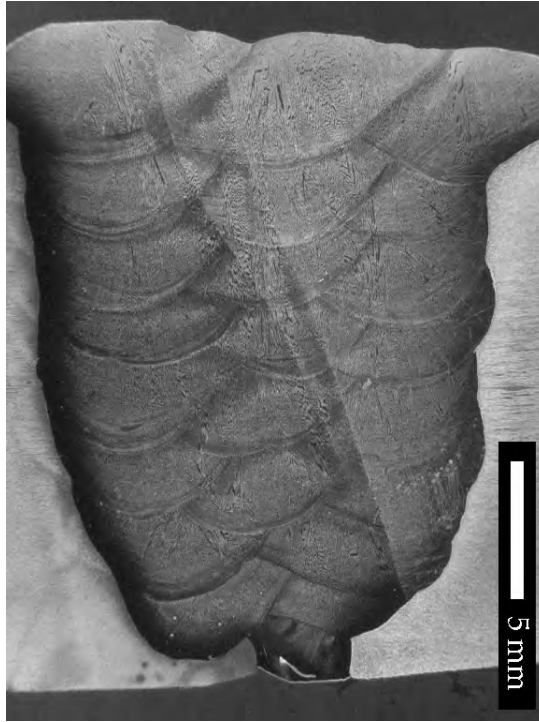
D20 perpendicular to the welding direction.
